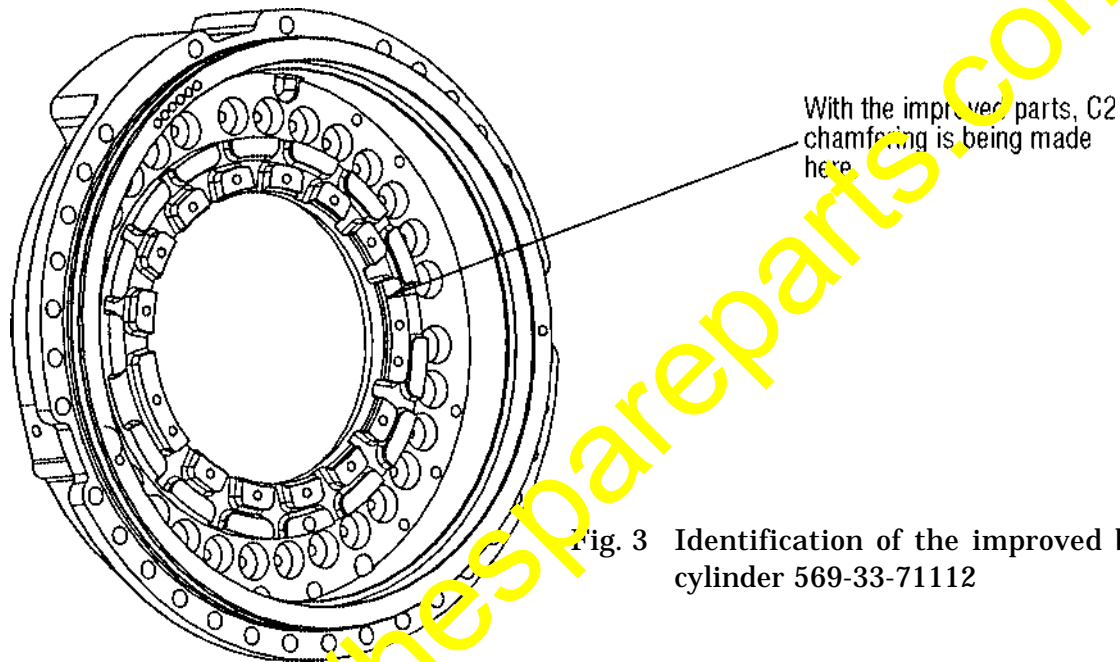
Identification of the improved brake cylinder 569-33-71112
